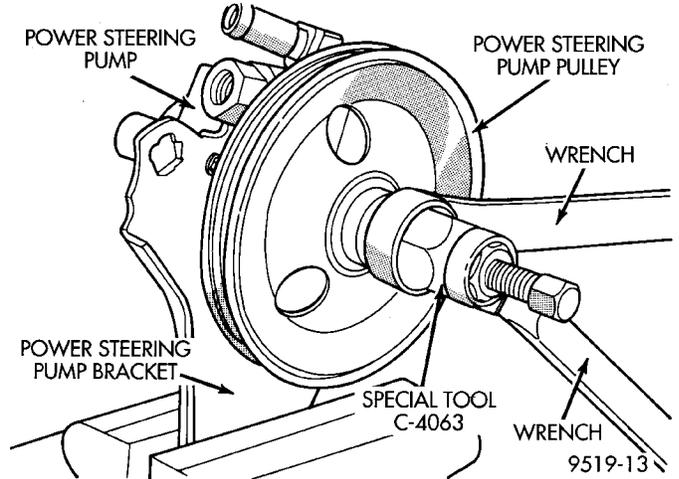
Installing Pulley On Power Steering Pump Shaft
